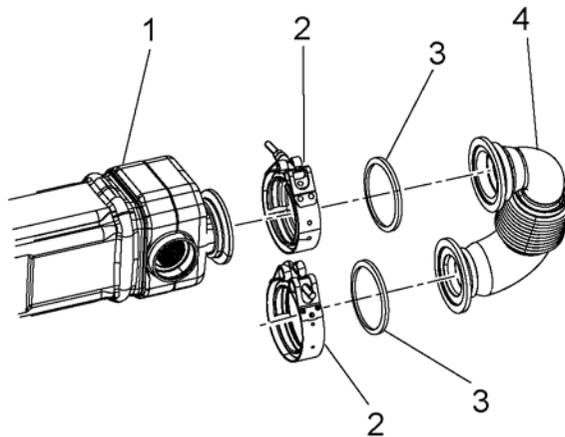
EPA07 DD15 EGR Cooler and Related Parts
